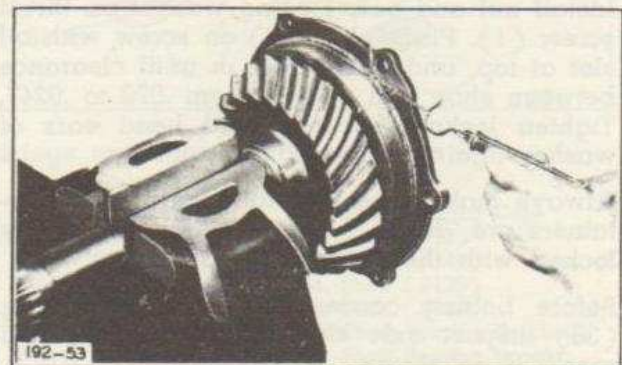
Testing 3rd Reduction Pinion Gear Bearing Adjustment
